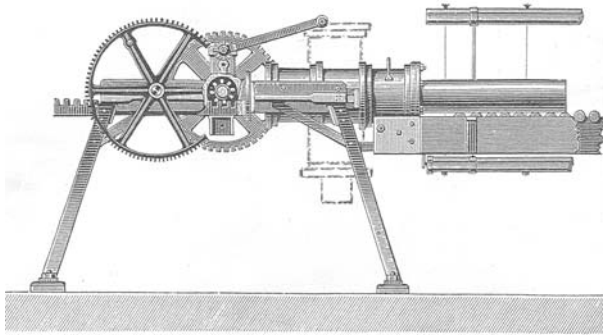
Piston extruder with hinged extrusion barrel (1870)
